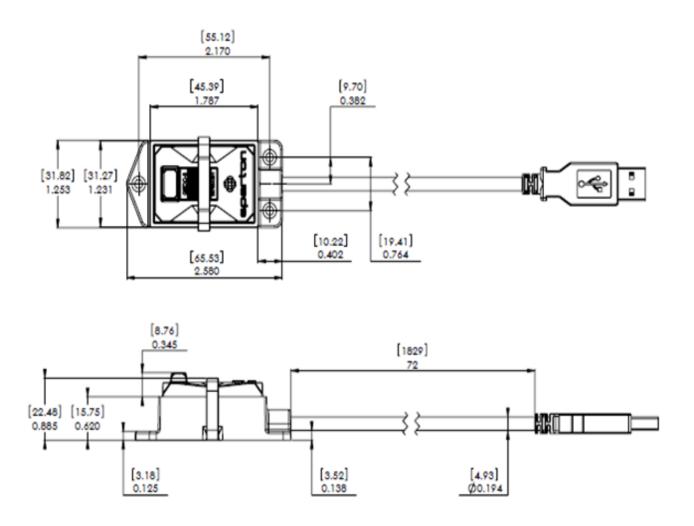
RM-1 RUGGEDIZED MOUNTING ADAPTER MECHANICALS
